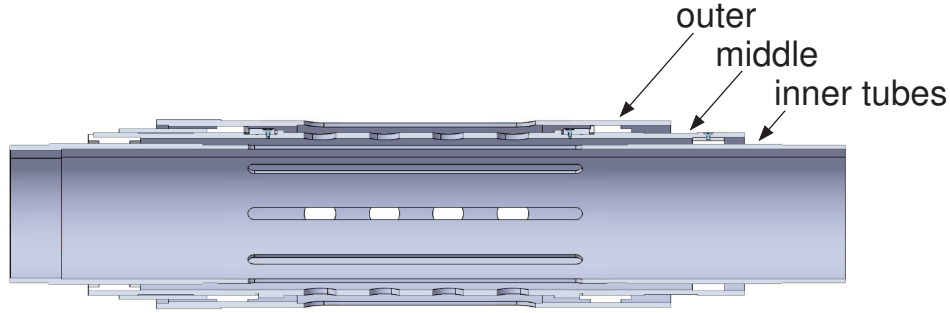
The three tubes which comprise the bearing unit of the TRIPLEX plunger. The stationary middle tube is attached to the inner support ring and connects to the first degrader foil. The inner and outer tubes move along the beam direction and connect to the target foil and second degrader foil, respectively. Figure from Ref. [63].
